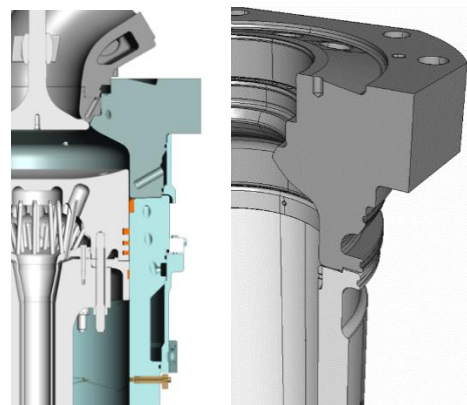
Upper part of cylinder liner with bore cooling (left) and cylindrical cooling water space (right)
